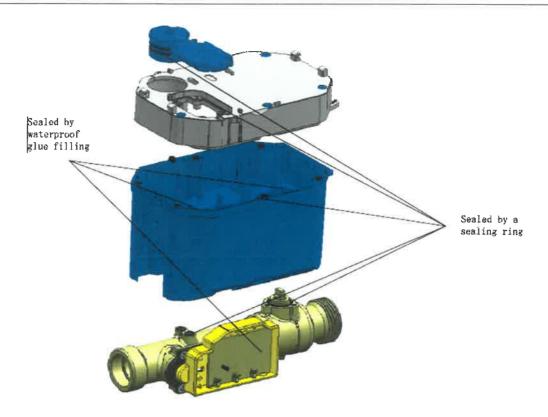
Exploded view of water meters type LXC-15 and LXC-20
